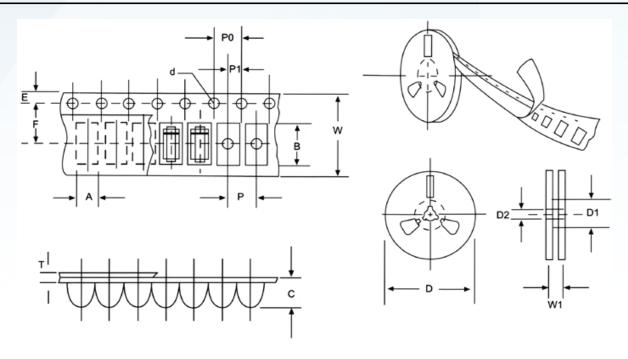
FIG: CONFIGURATION OF SURFACE MOUNTED DEVICES TAPING
